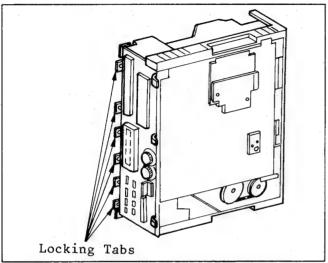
Opening of Bottom & Front P.C. Boards-(2)
